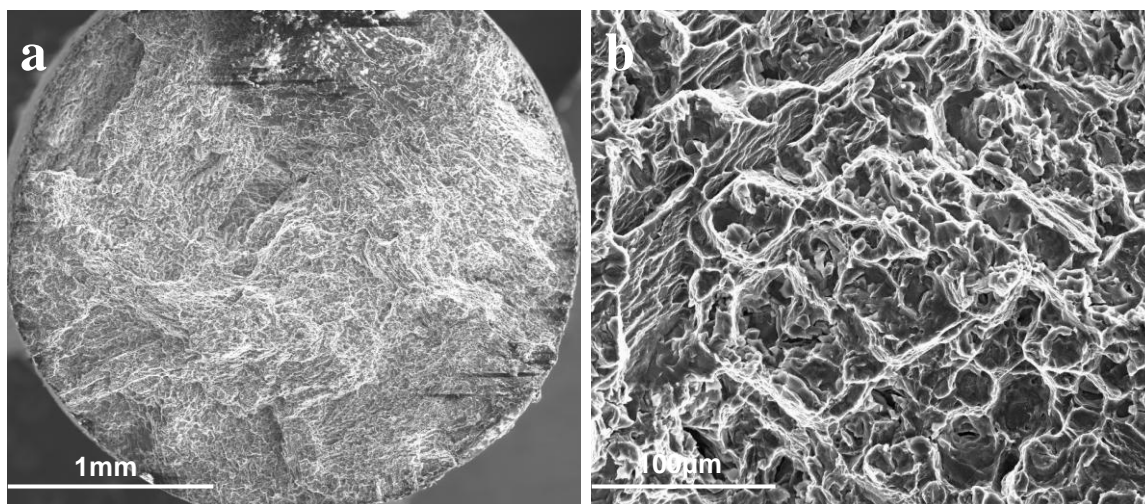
Representative fractographs of the AZ91D tested in air: (a) overall fracture surface, (b) the fracture surface showing dimples and occasional instances of brittle fracture
